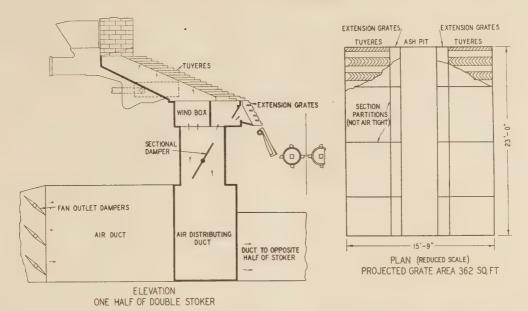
Sectional Damper System for Stokers of Delray Power House No. 2, Installed 1910-1915
